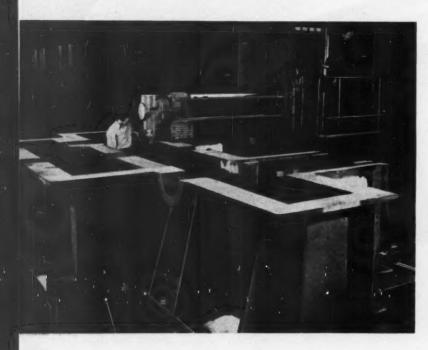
Here the underarm support has been extended more than 60 inches to mill a locating keyway on a combination steel casting and weldment that is used as a drive and pinion housing for a crusher.
